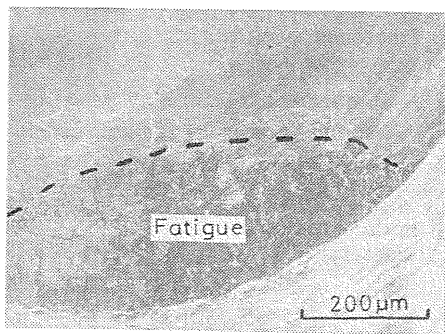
Fatigue crack previously formed in a wire (near the fractur portion)
